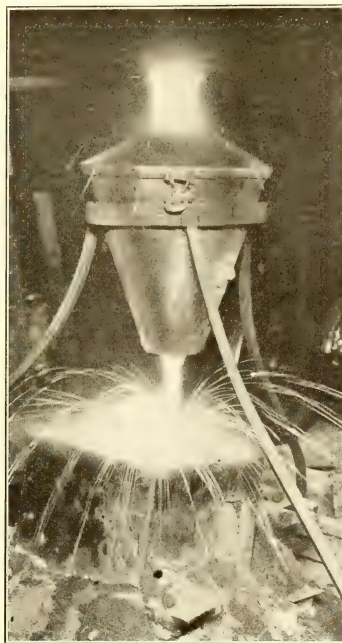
MAKING A WELD WITH THERMIT
